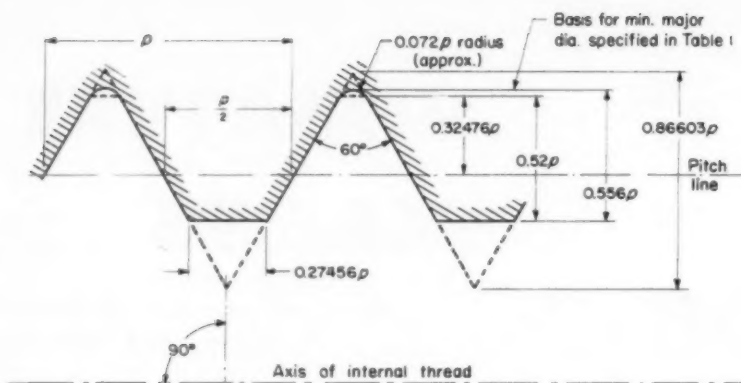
Design (maximum-material) thread forms of Miniature Screw Threads.
